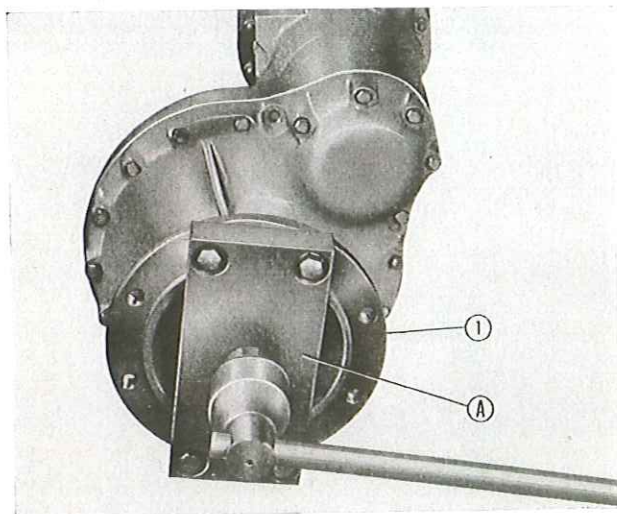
Withdrawal of the drive wheel shaft hub.
